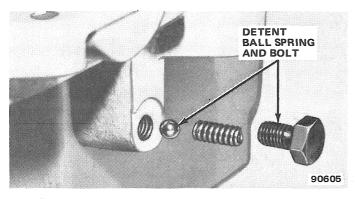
D-10 Detent Ball, Spring and Bolt Removal/Installation
